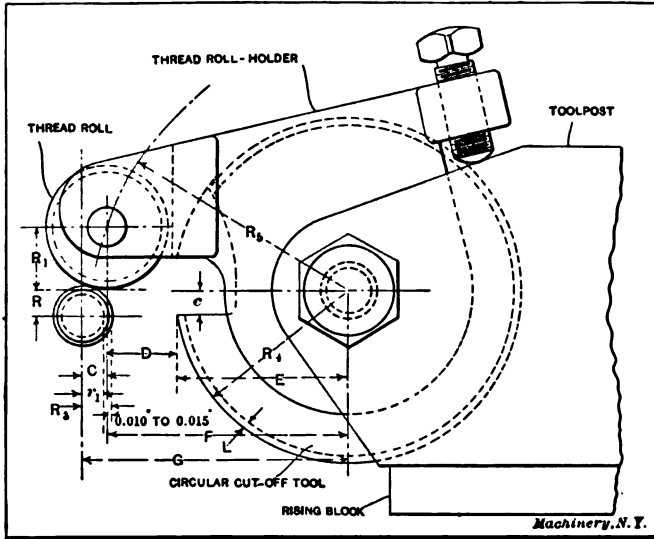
Diagram used in Finding the Total Rise on the Cam for Thread Rolling and Cutting-off
